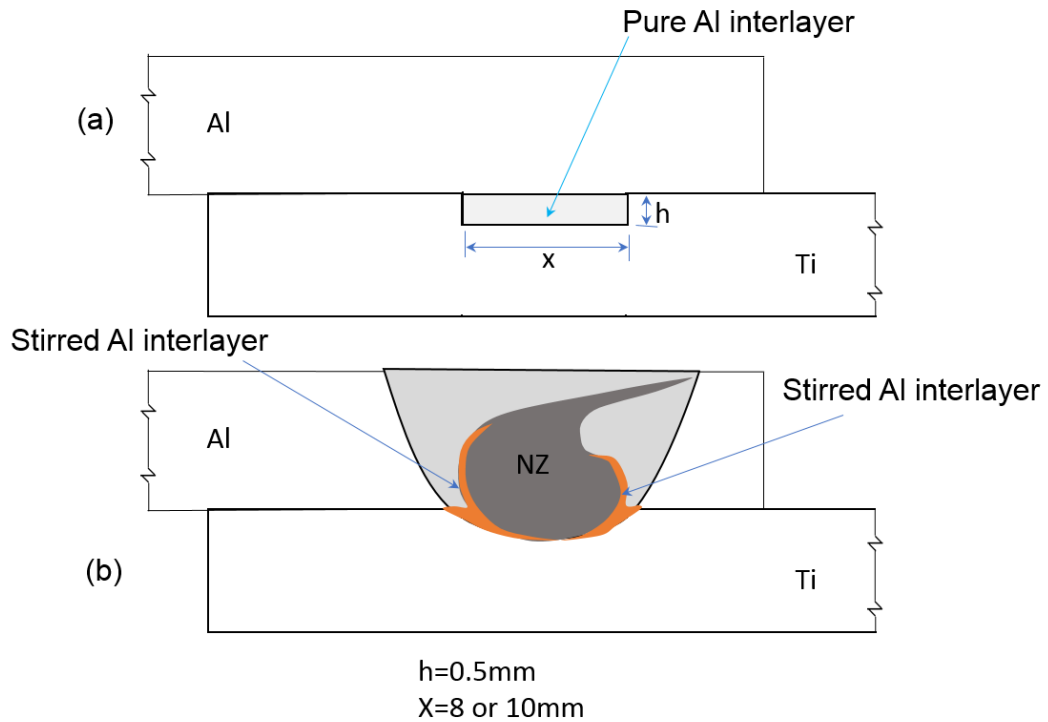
Schematic illustration of pure Al as an interlayer: (a) before welding, showing the placement of the Al interlayer fitted into the groove machined on Ti 6Al4V; (b) after welding showing the nugget zone (NZ) containing the stirred AA2024 and Al interlayer drawn around the edge of the tool pin during FSW.
